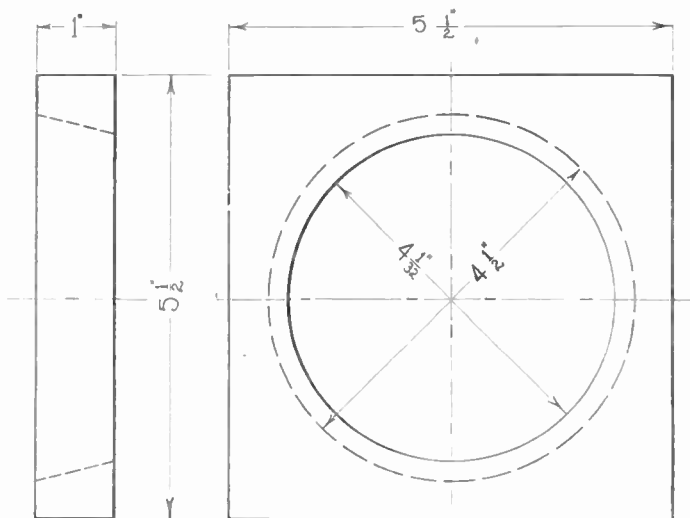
The ring, in which the outer coil is fastened with shellac.
